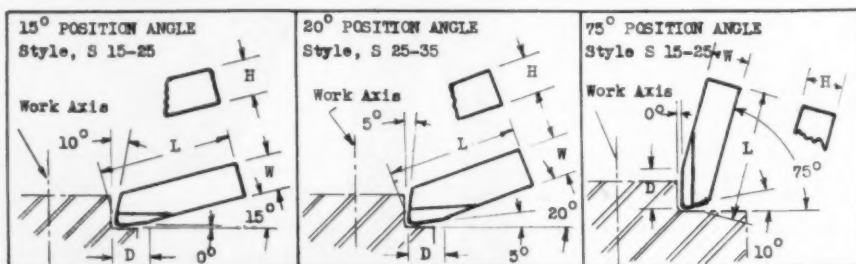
TOOL POSITION ANGLES WHERE PARTICULAR STYLES OF CUTTING TOOLS MAY BE USED EFFECTIVELY
